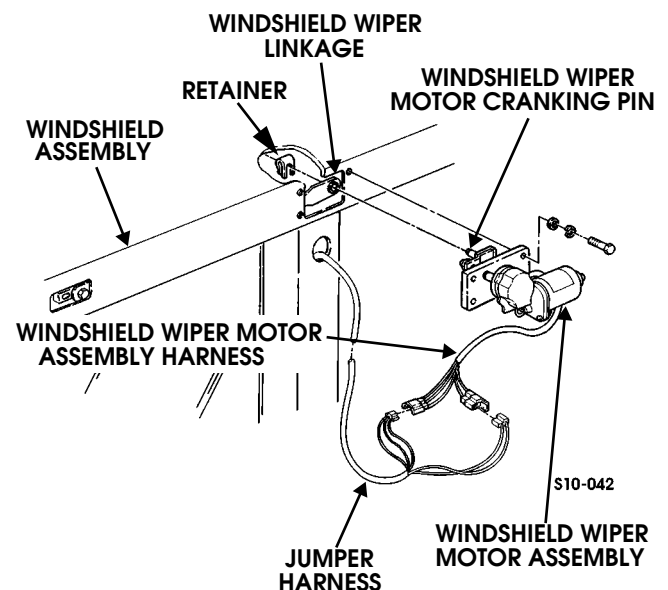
Windshield Wiper Motor Assembly Replacement
